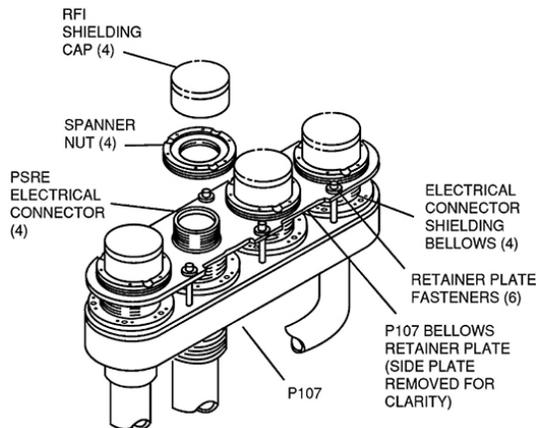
P107 bellows retainer plate, spanner nuts, shielding caps and gas storage assembly cover.
